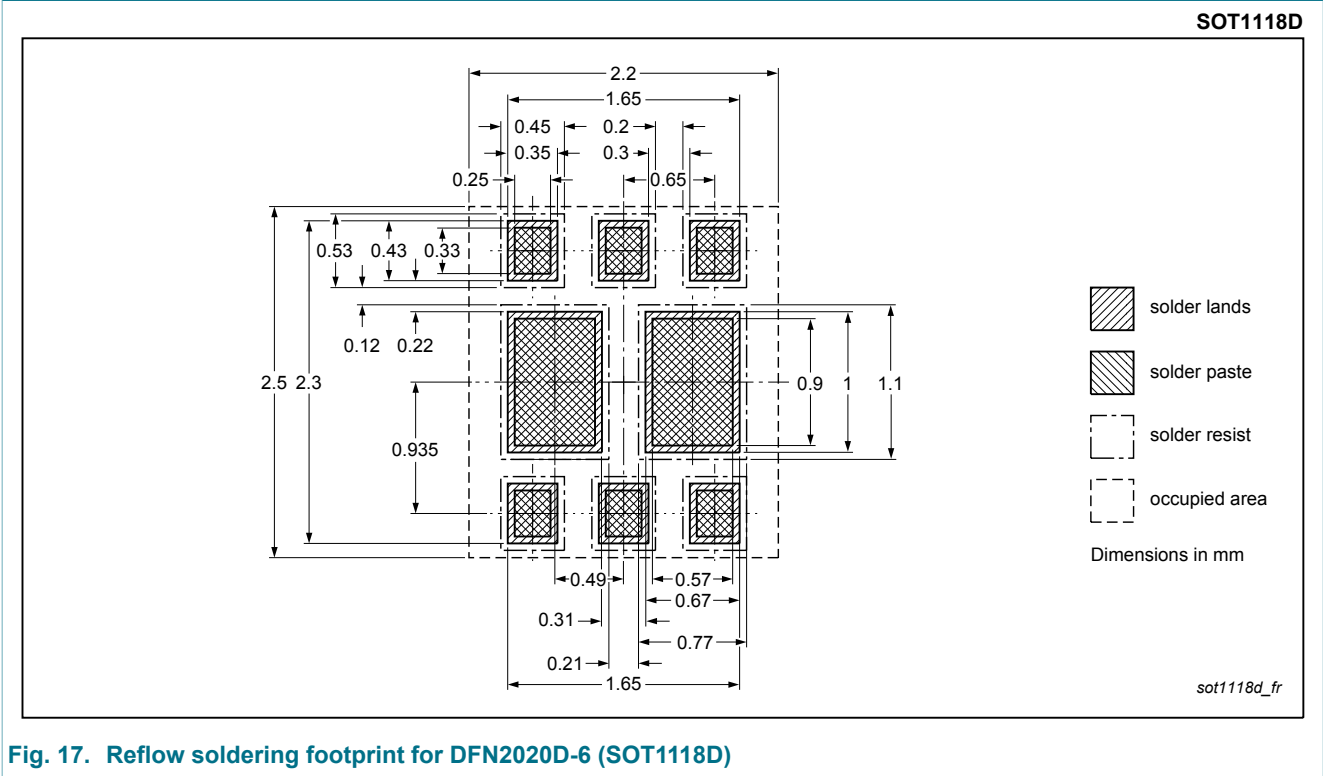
Reflow soldering footprint for DFN2020D-6 (SOT1118D)
